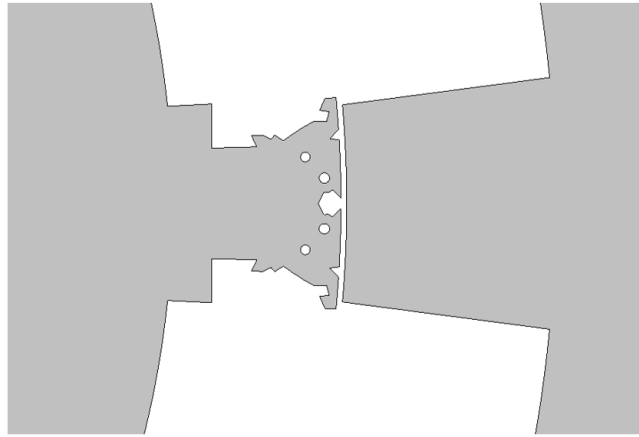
The shape of one rotor teeth after smoothing the design space shown in Figure 6.34
